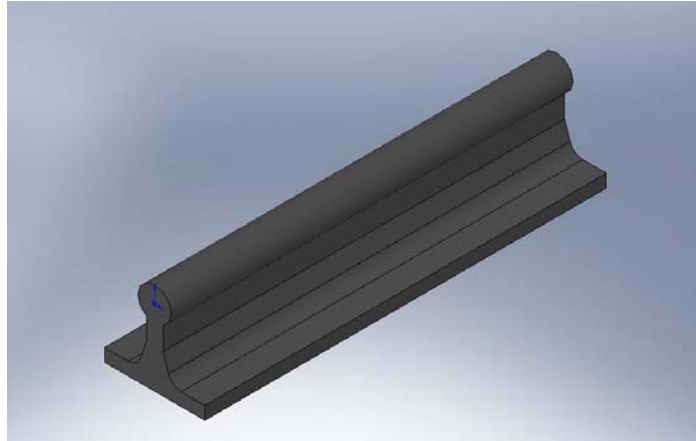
Rail to Provide Guide Way for the Motor Platform Movement
